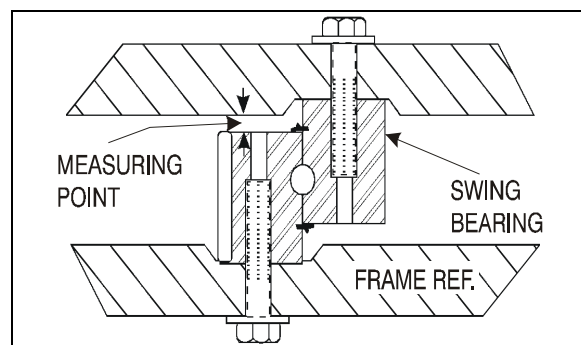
Swing Bearing Tolerance Measuring Point
